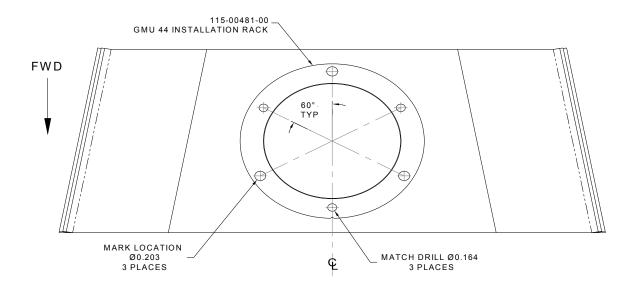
Magnetometer Shelf With Hole Pattern For GMU 44 Installation Rack
